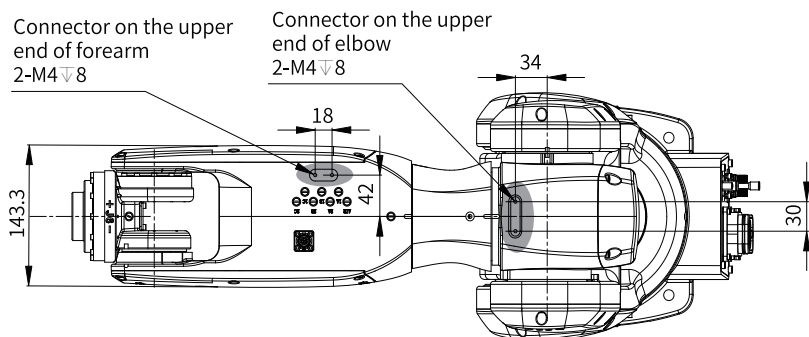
Installation position of pneumatic valve (unit: mm)
